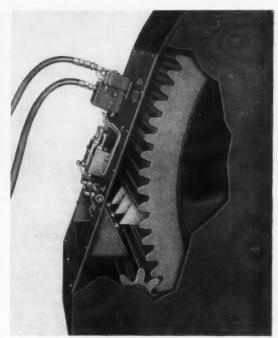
Spray panel mounted on gear housing for spraying lubricant on the gear teeth
